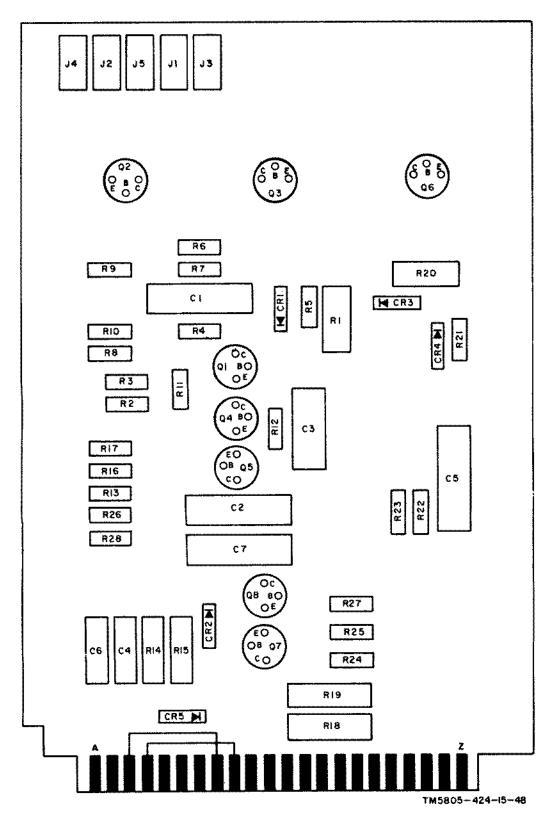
Printed-circuit cord assembly A15 (PC 80034160), component location diagram.
